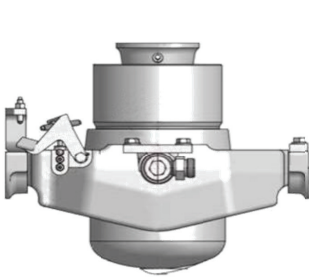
KRM CYLINDER INCL. CRADLE AND BRACKETS
